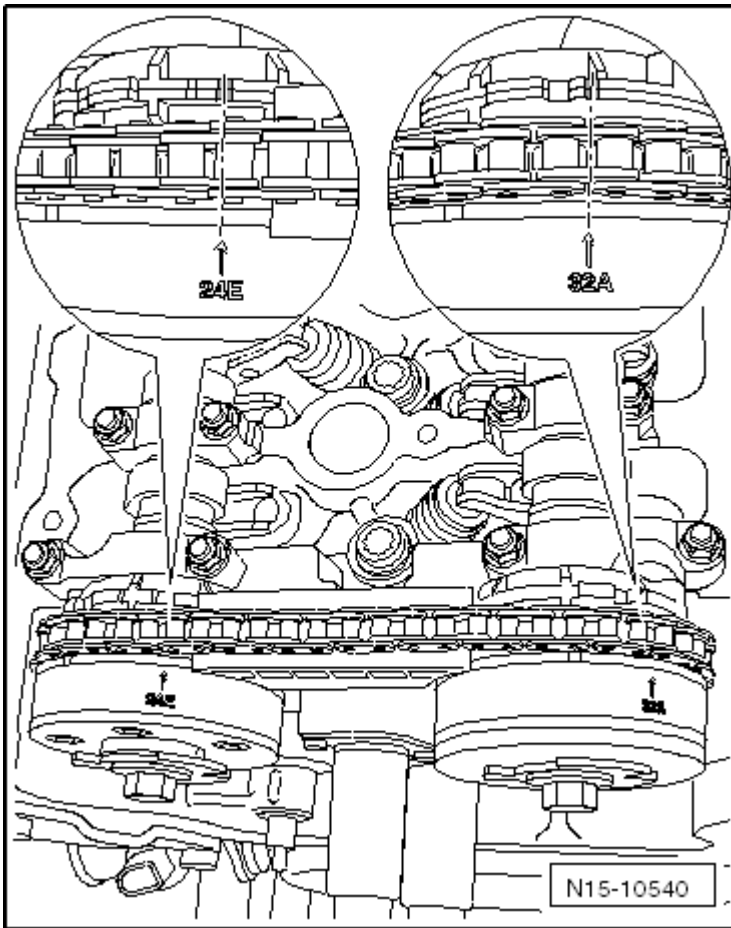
Verifying Installation Marks Of Camshaft Adjuster With Marks On Control Housing
